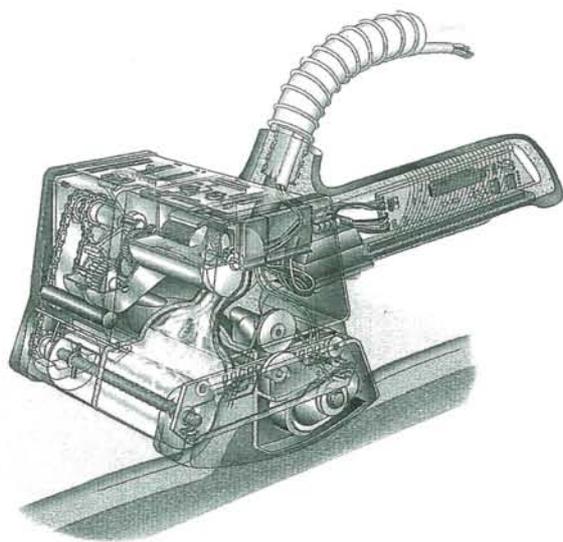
Mechanical drawing of the Endermologie® handpiece. Courtesy LPG Endermologie USA.
